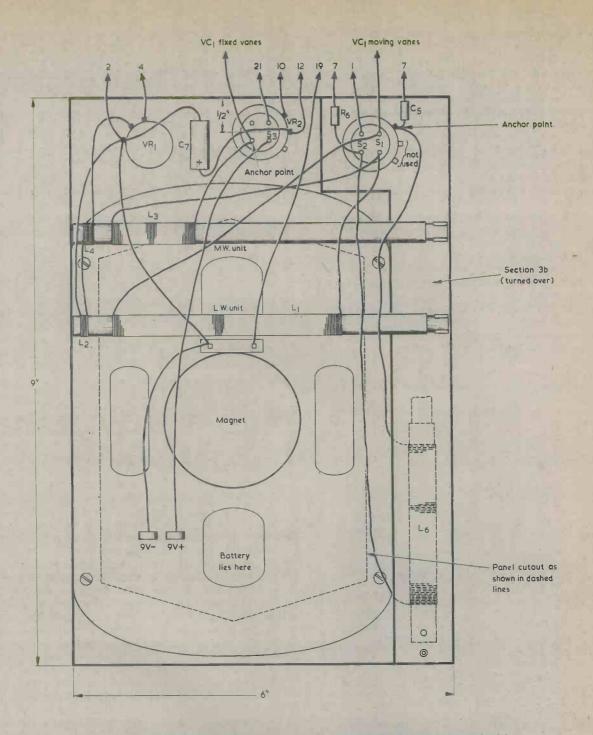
The front panel viewed from the rear, showing relevant dimensions and wiring. The numbers at the top refer to the tags in the 21-way tagstrip of Fig. 2
